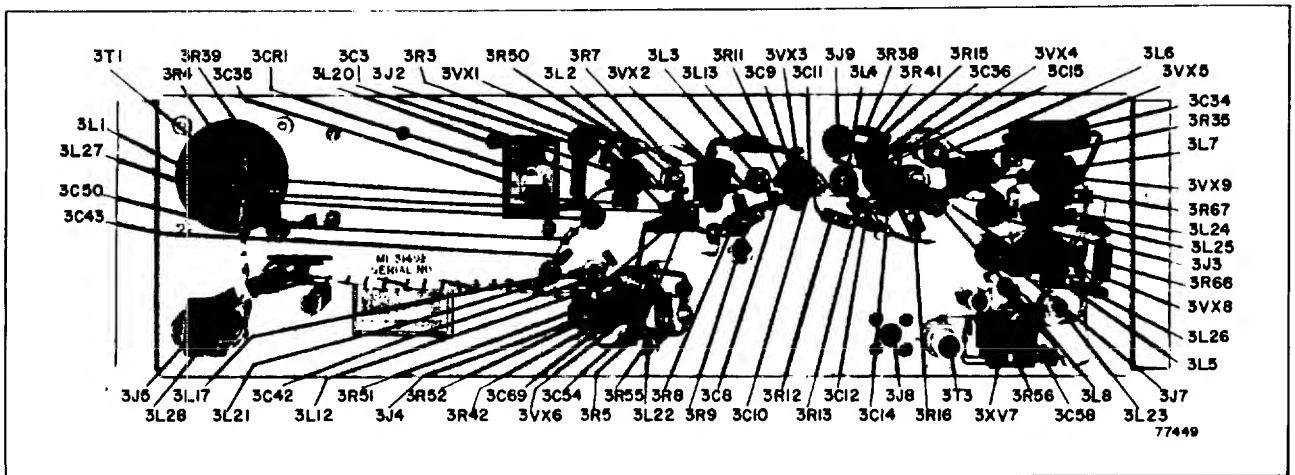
Terminal AFC Unit, MI-31492-C—Rear View, Dust Cover Removed
